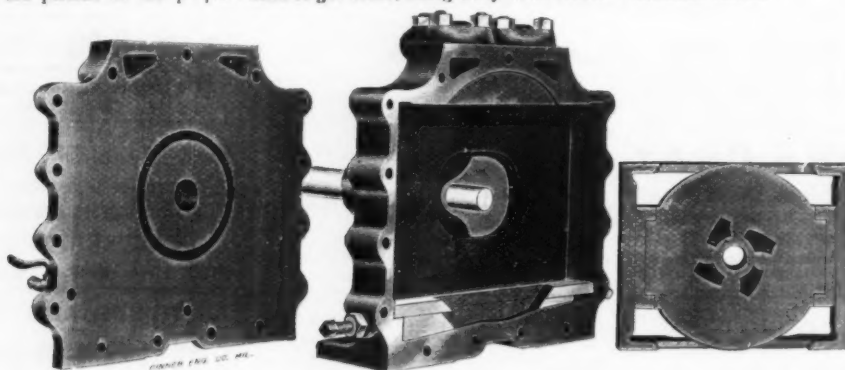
PISTONS REMOVED FROM CYLINDER.
